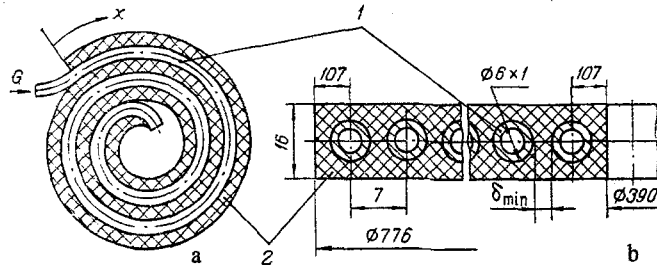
General view and sectional view of test element: a) general view; b) sectional view of test element; 1) spiral channel; 2) insulating layer.
